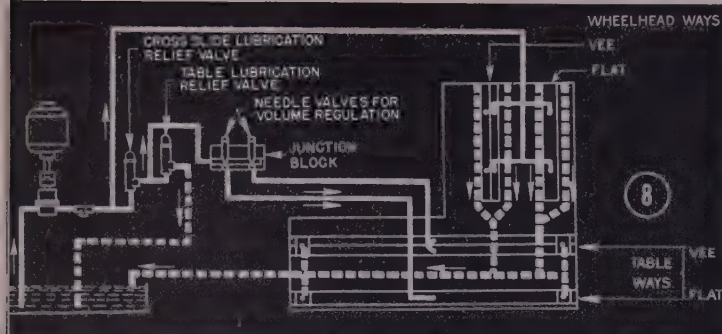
Diagram of lubrication system on ways of a 4-inch plain hydraulic grinder. Sketch courtesy Cincinnati Milling and Grinding Machines Inc.
